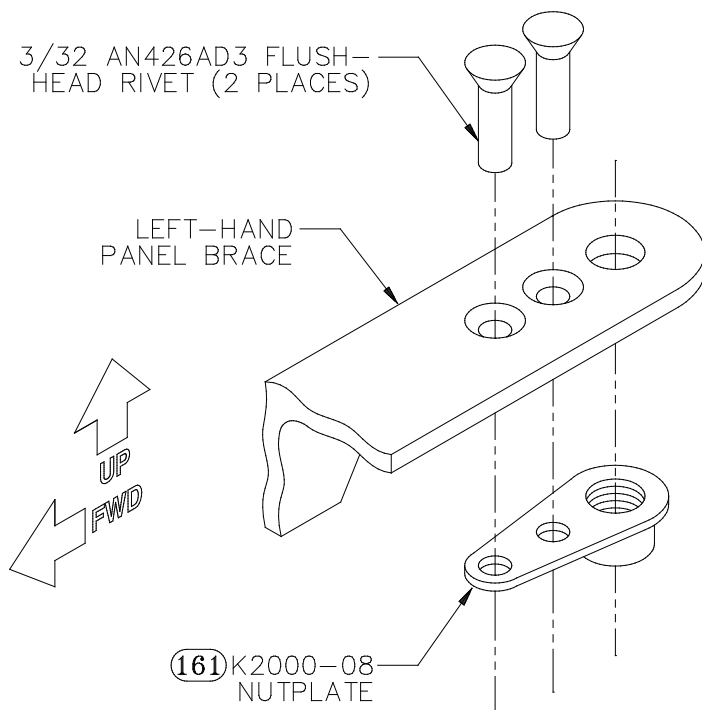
Riveting a Nutplate to the Aft End of the Panel Brace
